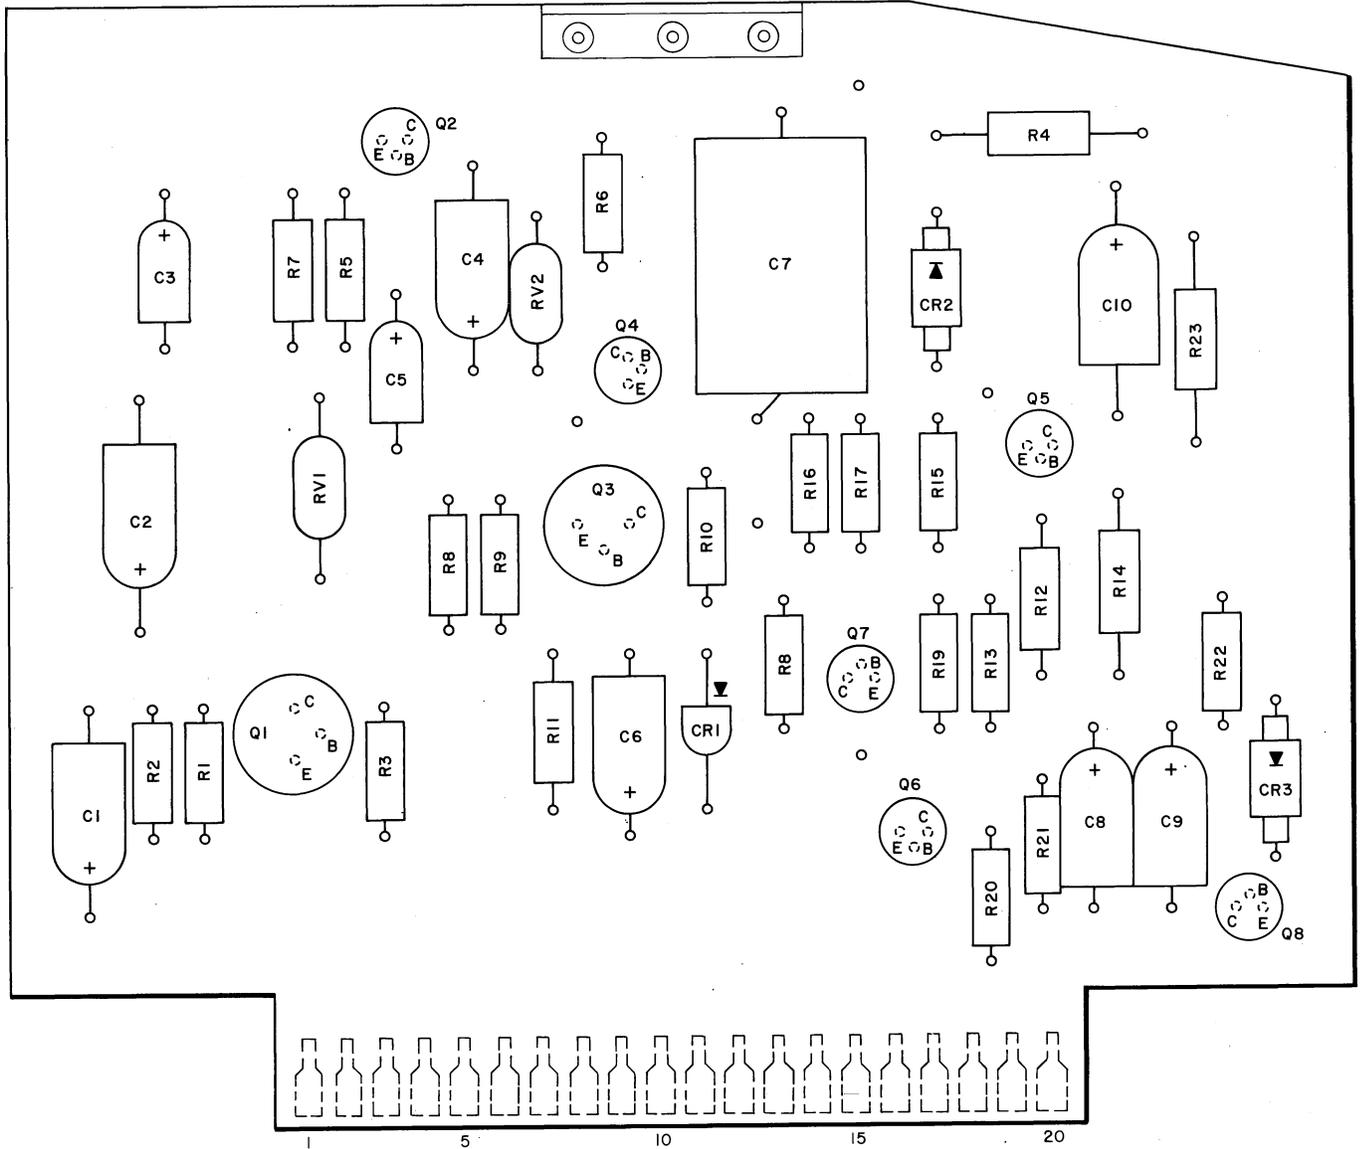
CP-66 Component Replacement—Limiter and Detector, CP-66D, Component Layout
